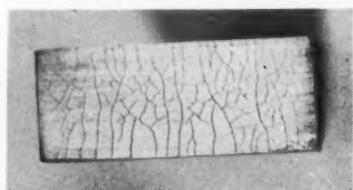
Network of surface cracks, made more clearly visible by dry magnetic particle method, in hardened tool steel that was surface ground with too heavy a down feed. (Actual size)
